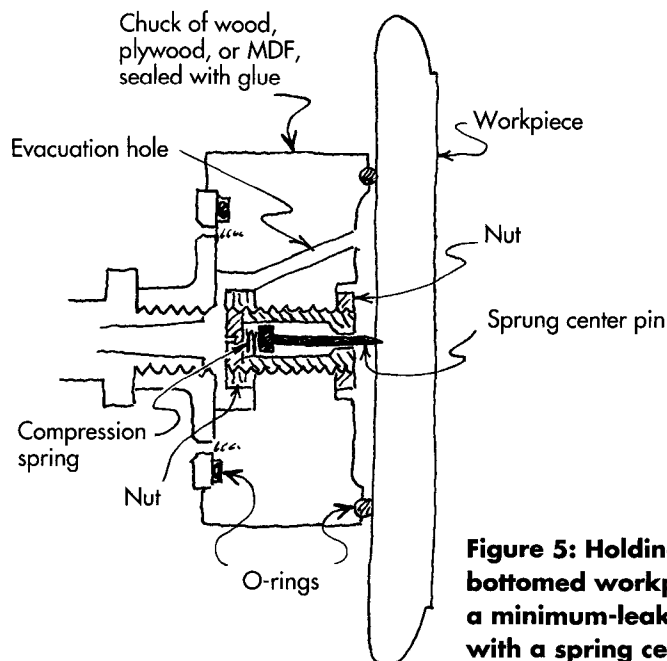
Holding a flat-bottomed workpiece on a minimum-leakage chuck with a sprung center pin
